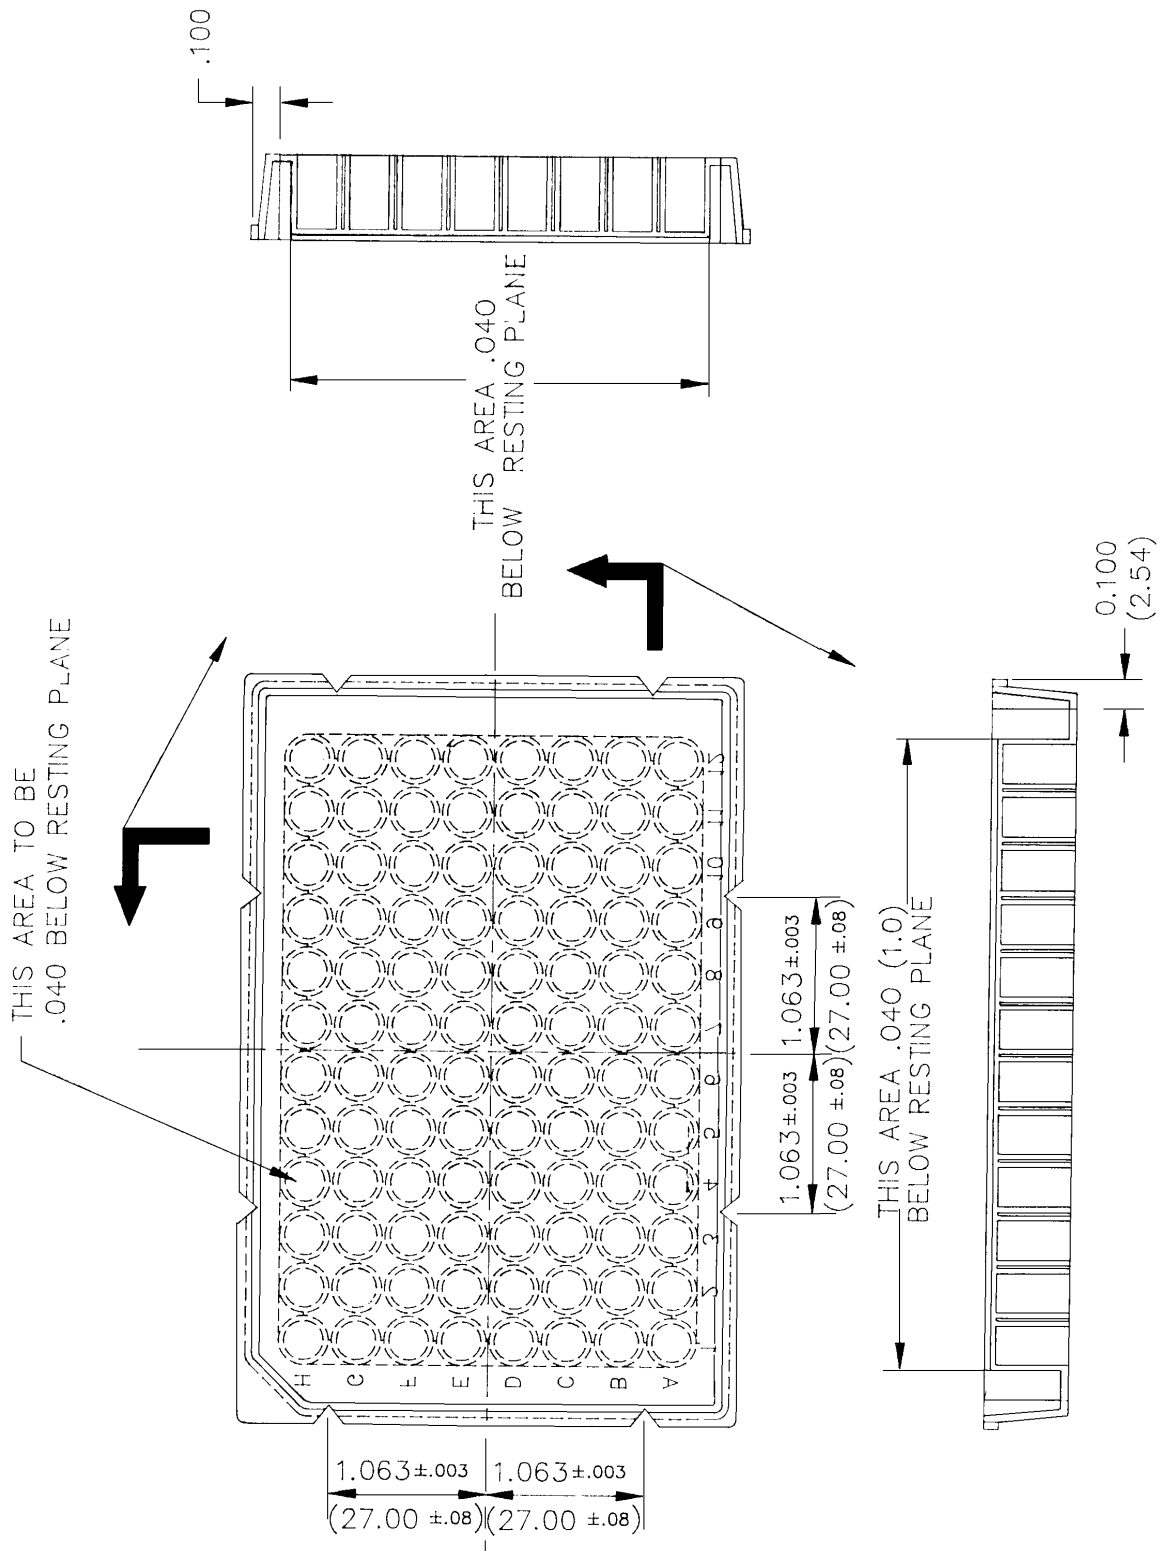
General layout – bottom view. Dimension in inches and (mm).
